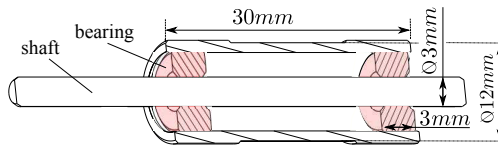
Cross section of the bearings, pressed into the steel cylinder.
